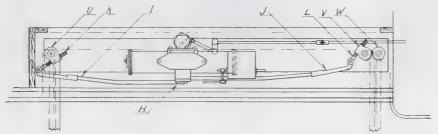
PLAN OF DOOR OPERATING MECHANISM.
